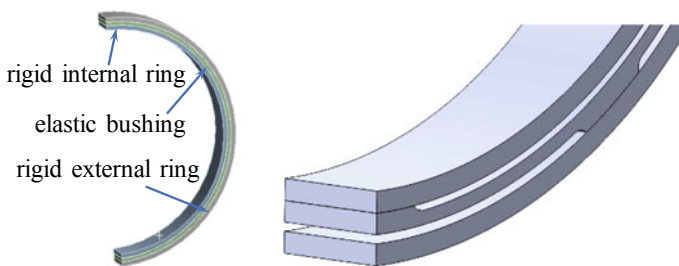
Contact of the elastic bushing with the stator housing and the bearing
